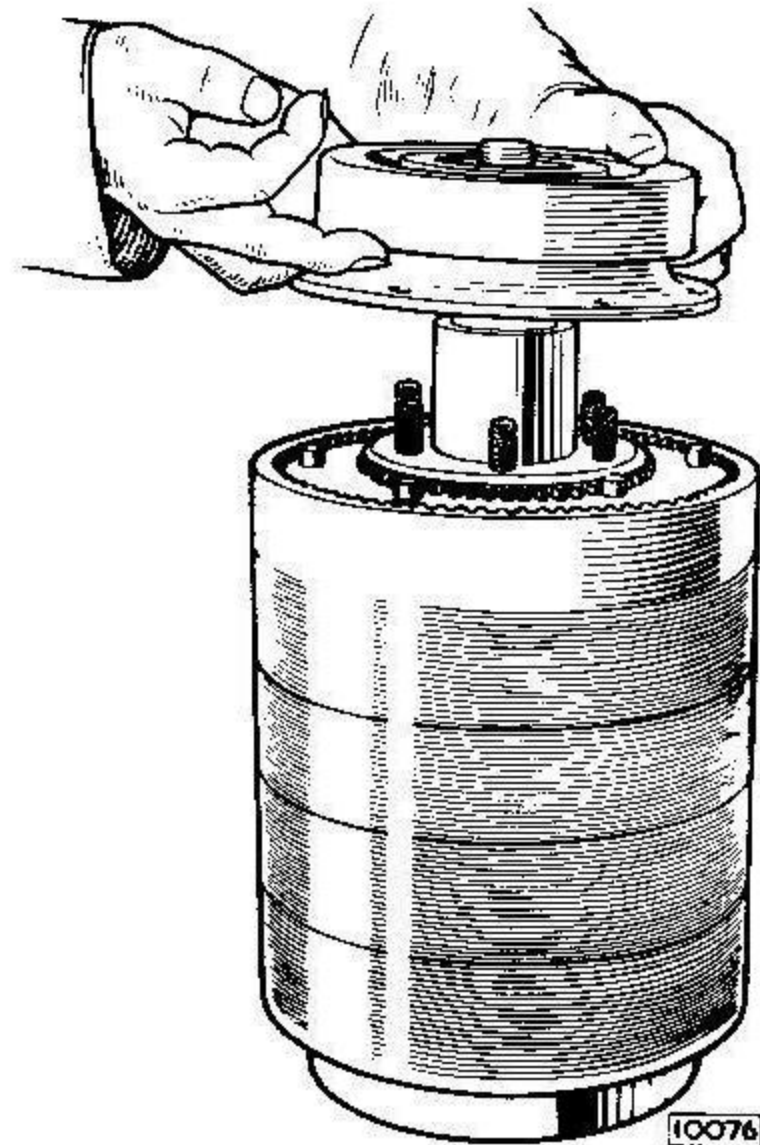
Fitting the clutch sliding member. Note the springs in position and the locating pegs.
